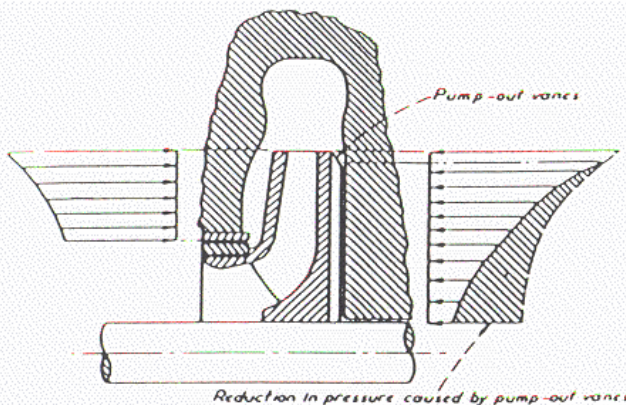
Reducing axial thrust of single-suction impeller with pump-out vanes
